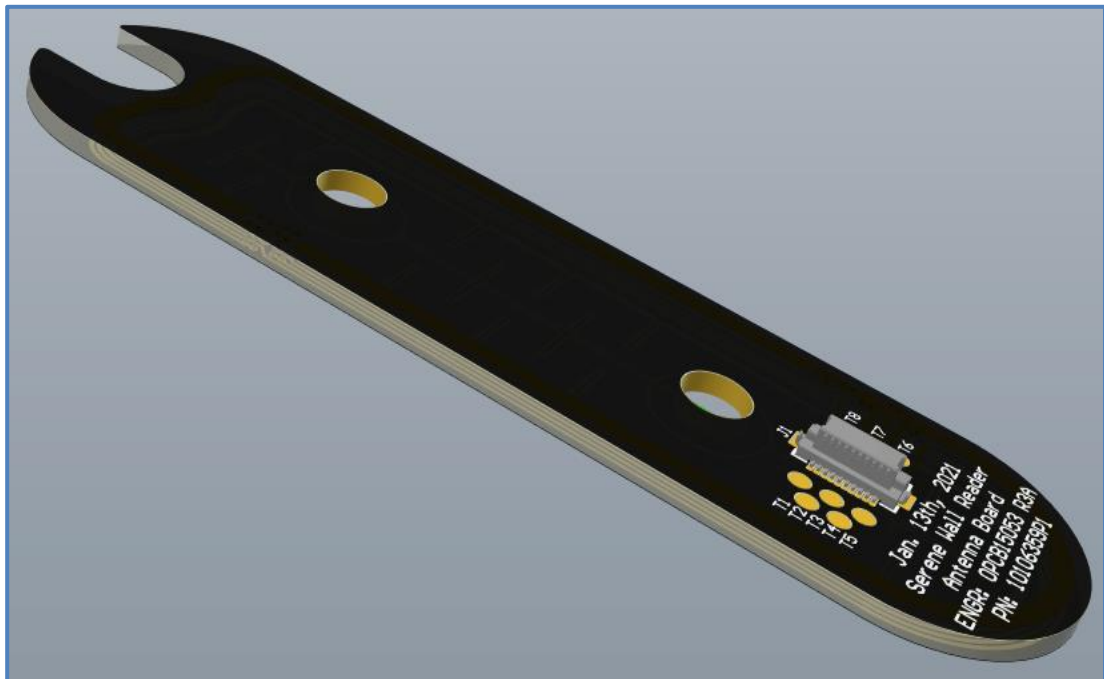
RFID Reader Antenna PCB electrical assembly with Connector
